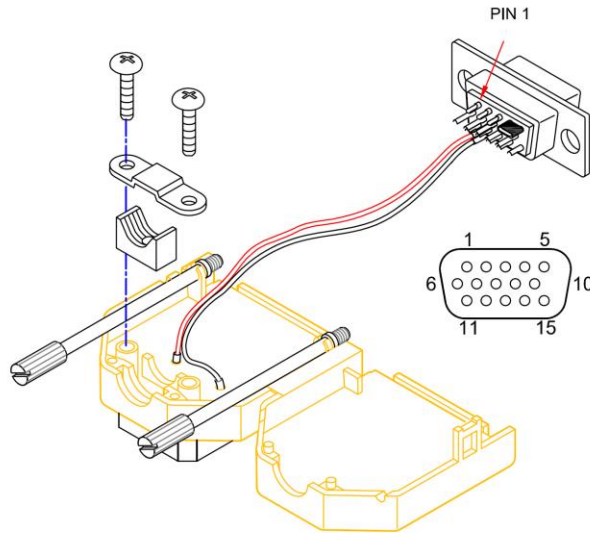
Remote Connector and Buzzer Assembly , REMT:BUZ:SH:A:XX
